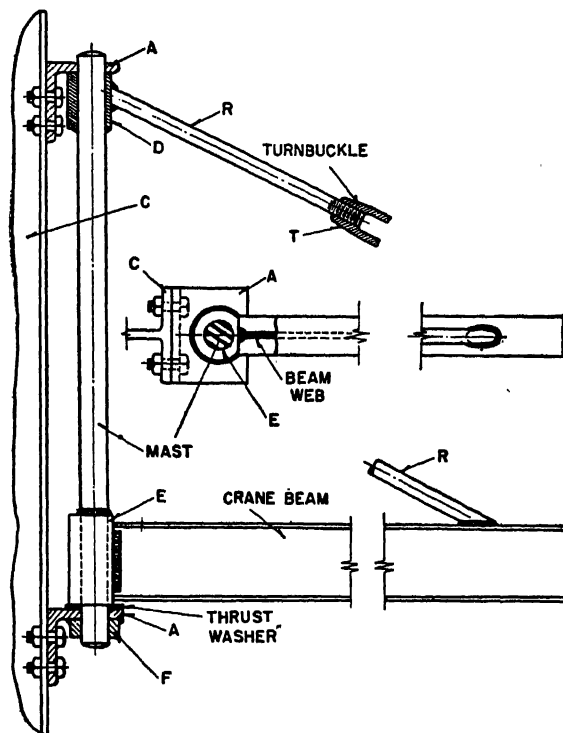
Wall-supported Arc Welded Jib Crane.
